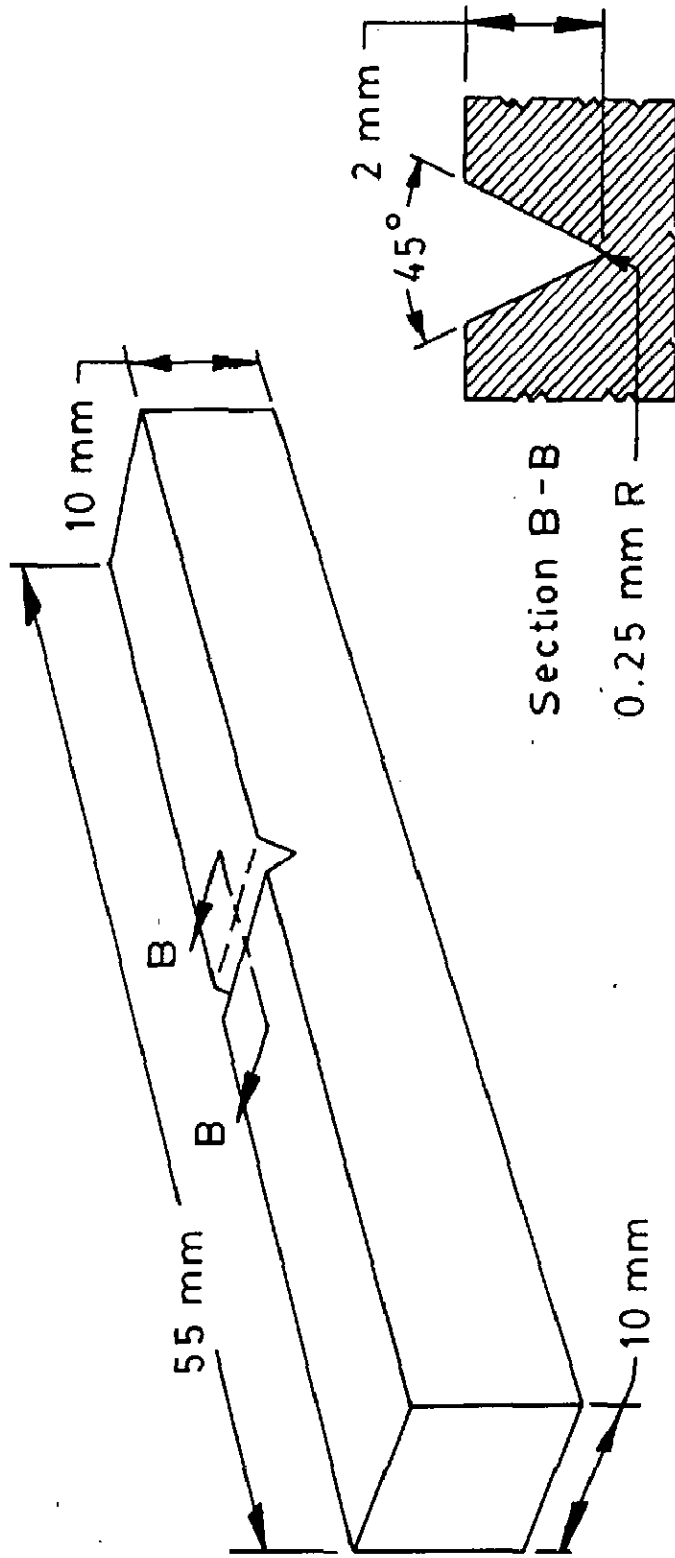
CHARPY V-NOTCH SPECIMEN FOR DYNAMIC FRACTURE TOUGHNESS TEST (ASTM E 23).
